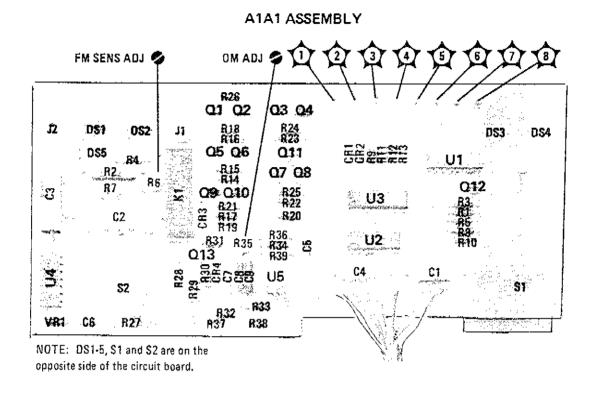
A1A1 Front Panel Assembly Component, Adjustment and Test Point Location (Part of Change 3)
